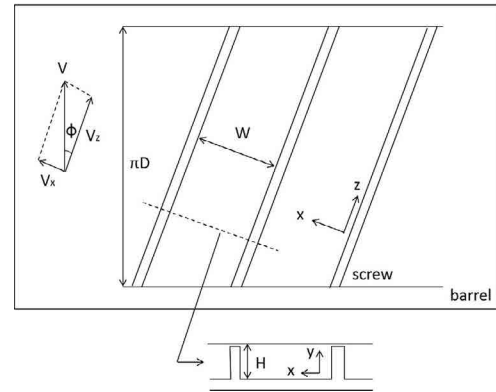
Geometry of unwound screw and barrel in screw extruder.
